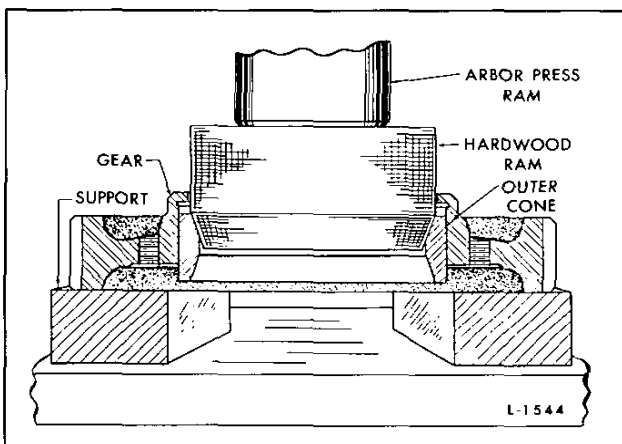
Hardwood Ram for Pressing Outer Bearing Race from Gear
